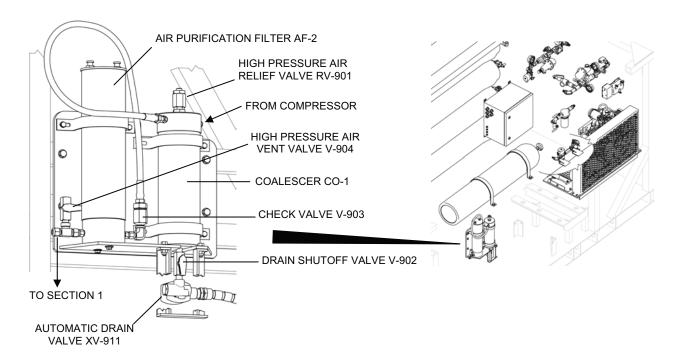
Coalescer CO-1 and Air Purification Filter AF-2.
